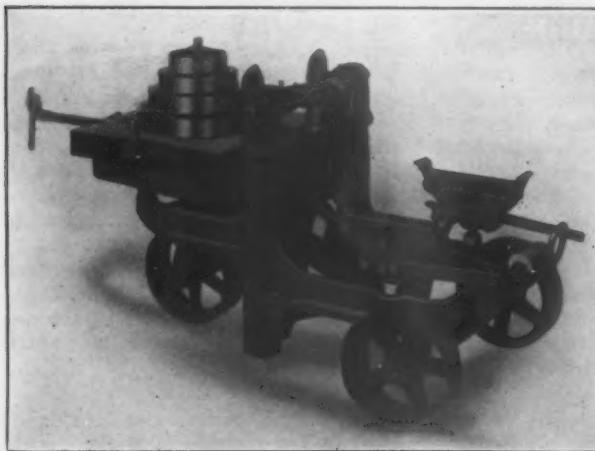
The Pattern Mounted on the Turn-Over Frame.
